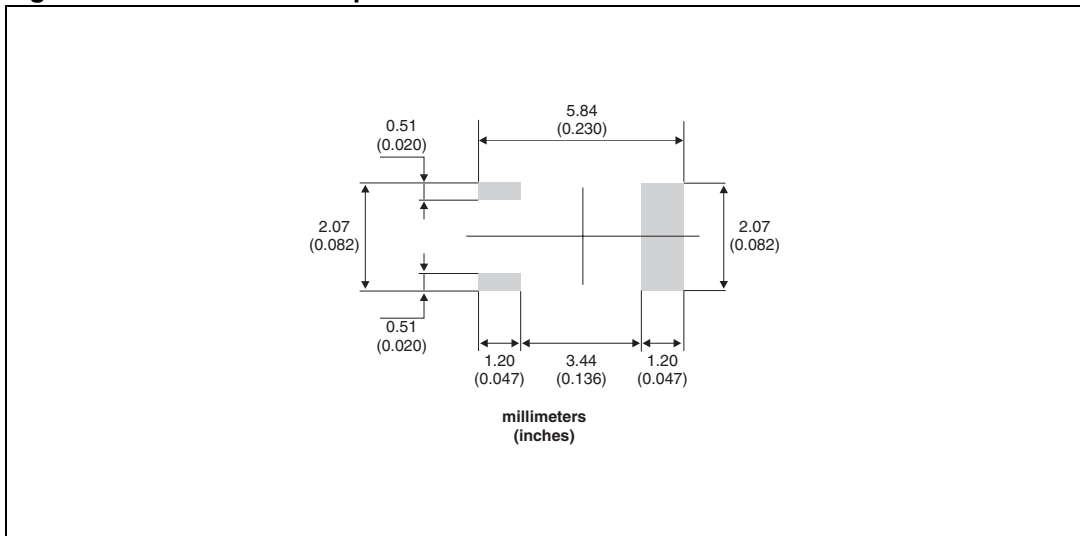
Footprint and connectors for SOT-223 or SMBflat-3L (dimensions in mm)
